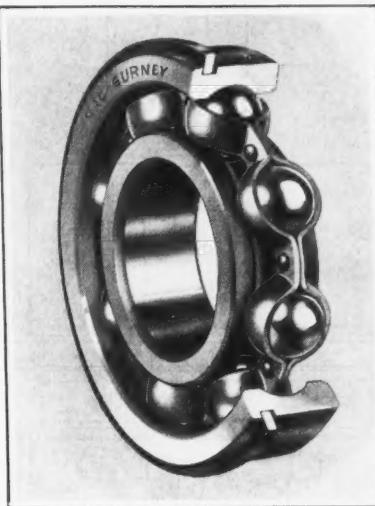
G Type Ball Bearing Designed for Assembly in Holes Bored Straight Through
